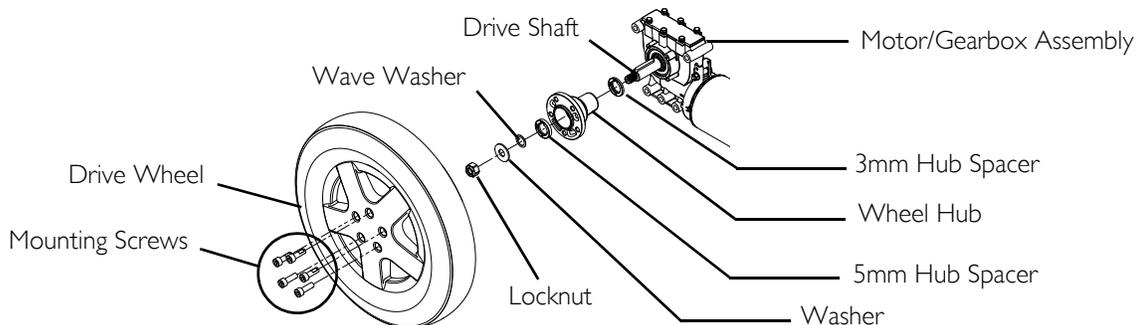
Removing/Installing the SSD Motor Drive Wheel/Wheel Hub
